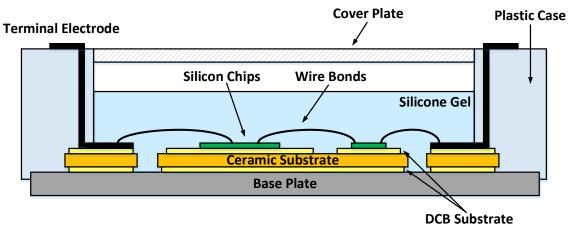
Cross-sectional view of a basic IGBT power module.
